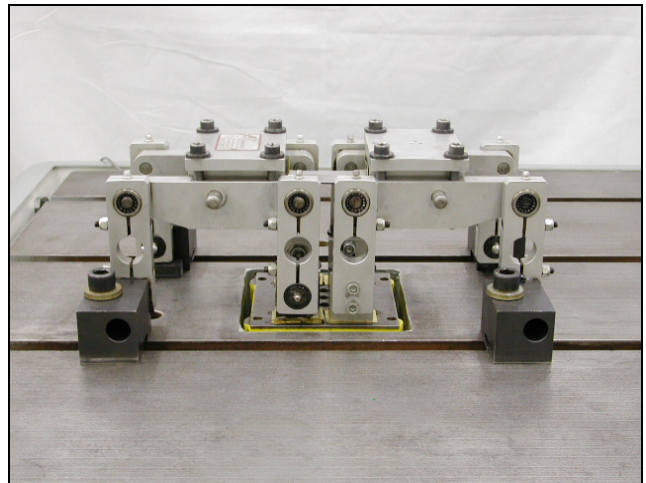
7076-T6 Fatigue specimen in 4-point bend fixture
